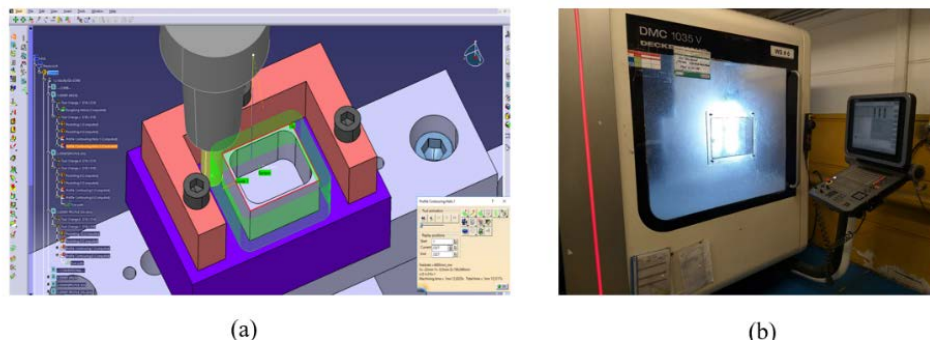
Milling operation (a) CAM processing (b) CNC vertical machining
